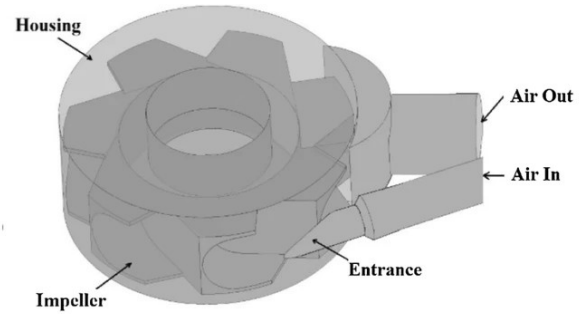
3D-model of a pneumatic rotary actuator used in a dental drill, example of a generally well-known handheld medical device working with a pneumatic turbine (taken from [22])
